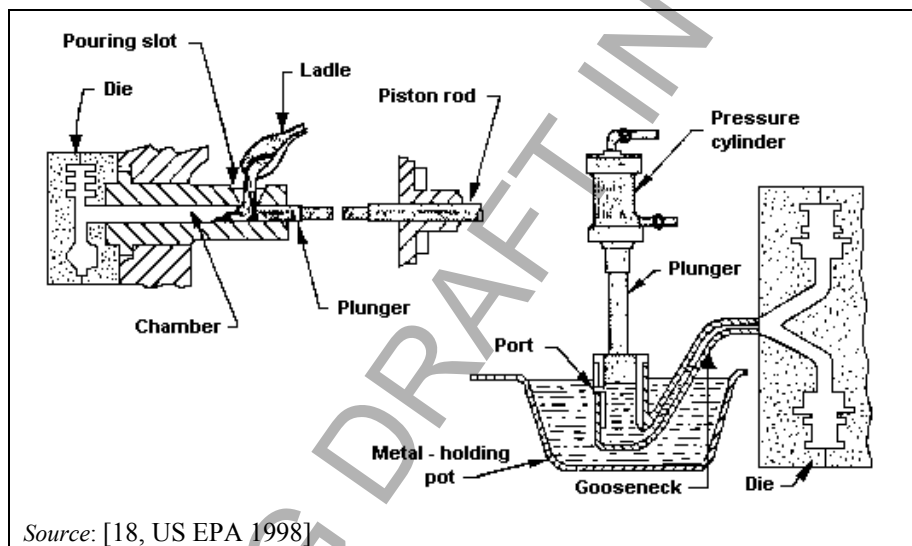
Cold-chamber and hot-chamber high-pressure die-casting devices
